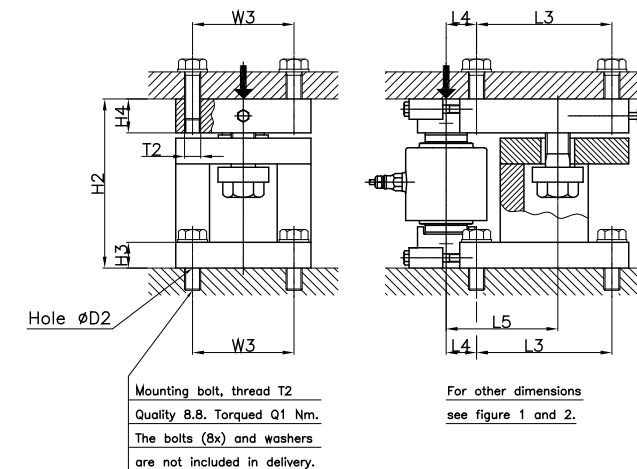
BOLTED MODULE FINALLY INSTALLED.
